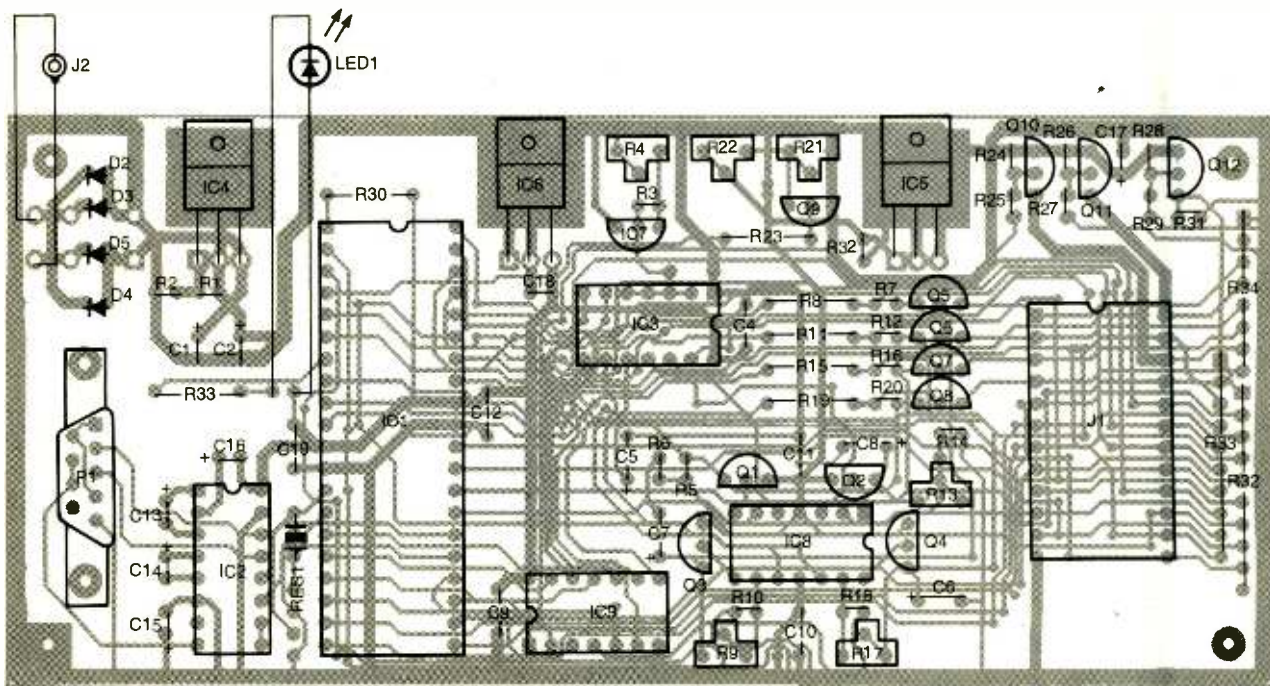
Once you have an etched board, this parts-placement diagram will guide you in locating the components. Due to its compact size, many axial components are mounted vertically.
